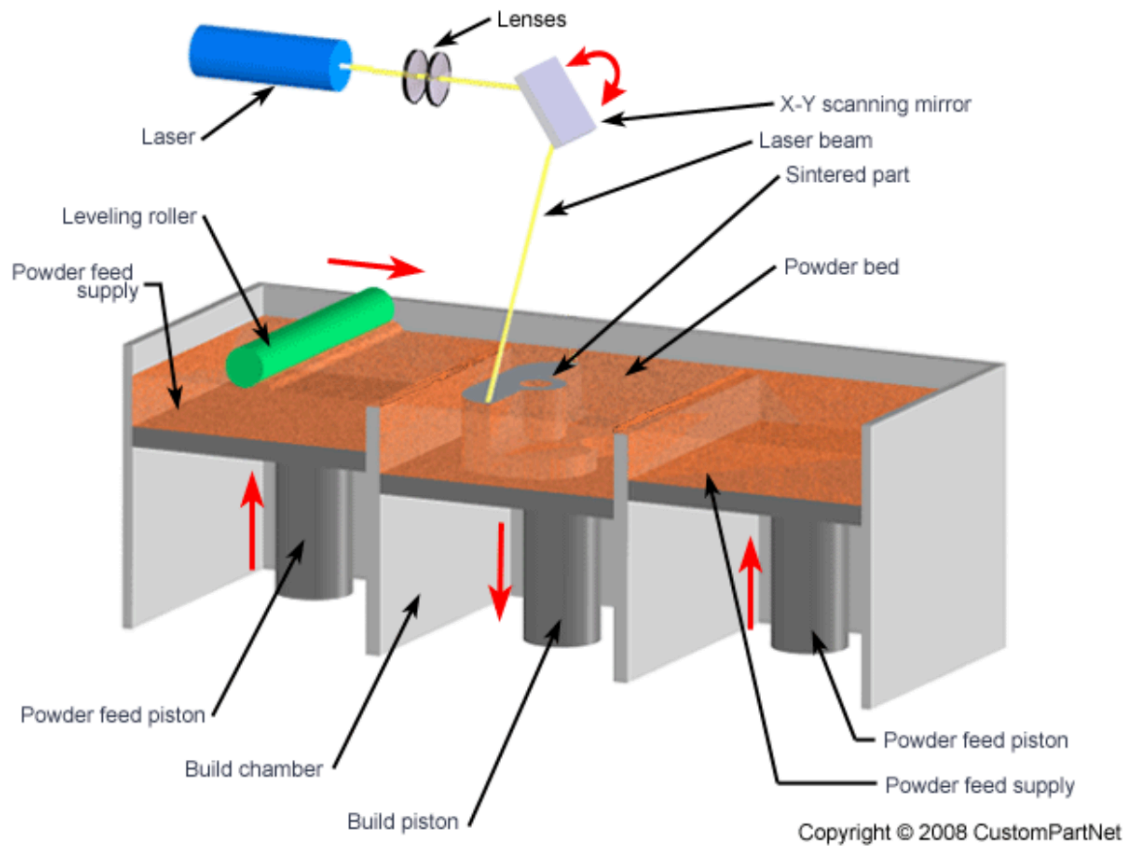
Schematic arrangement of a conventional LS machine with roller placement of powder [28]
